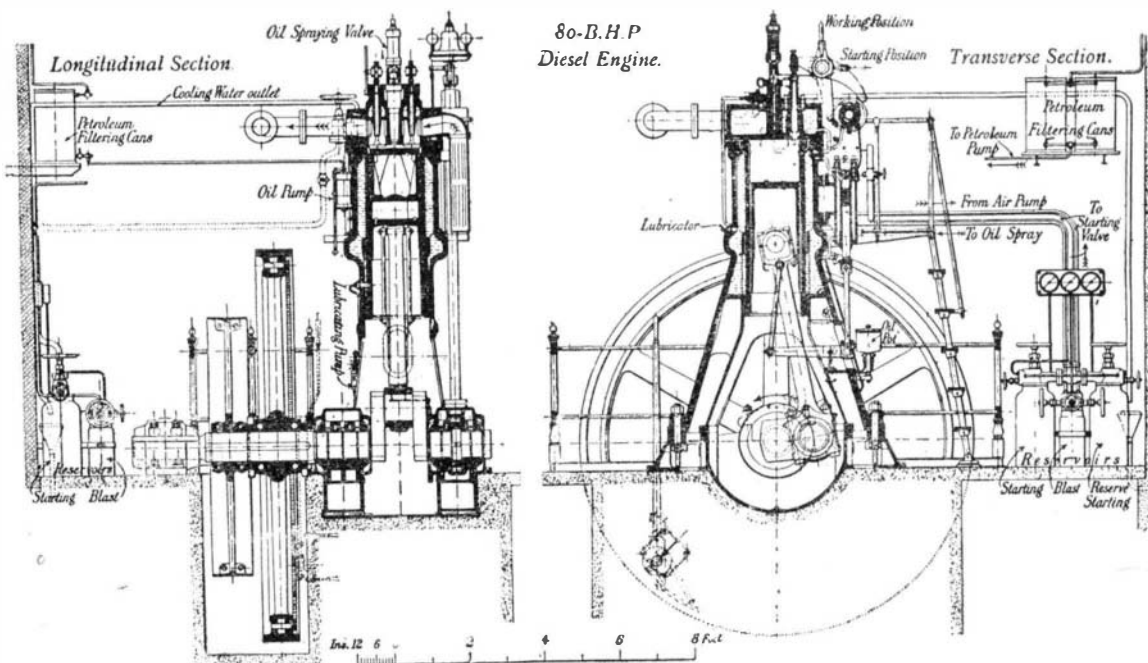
SECTIONS OF 80-BRAKE-HORSE-POWER DIESEL ENGINE.
